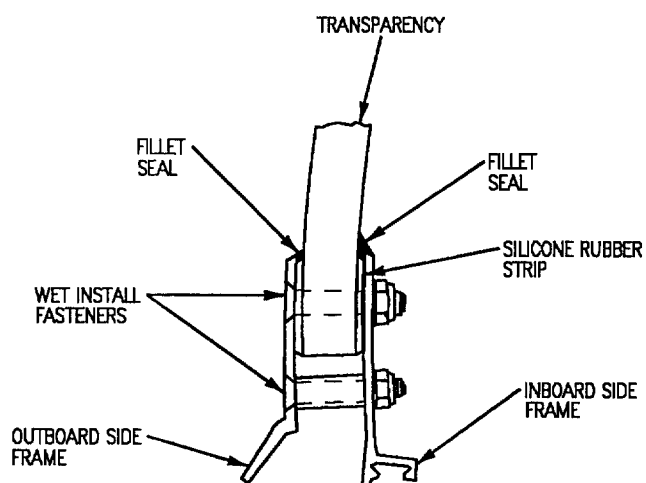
Inspection or Replacement - Outboard Side Frame (Sheet 3)
